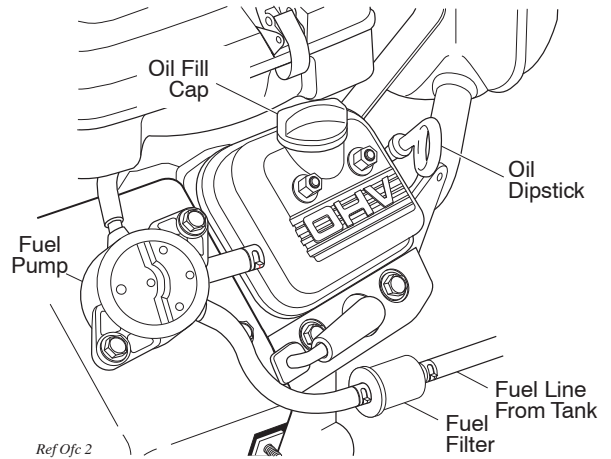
Oil Fill Cap, Dipstick and Fuel Filter
